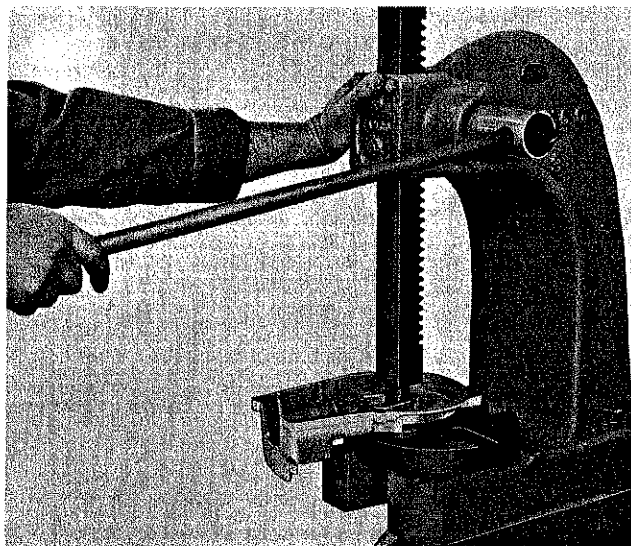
Using an arbor press and a driver to press the oil seal from the crankcase cover.
